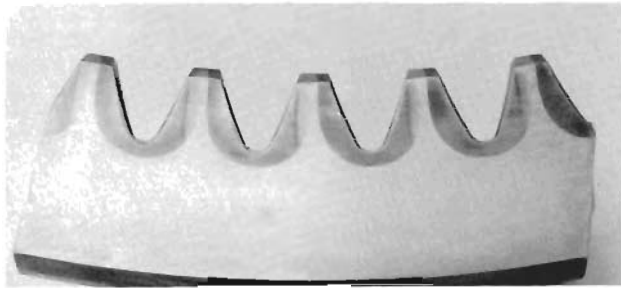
End face nital-etched pattern of a consecutive-tooth-space induction hardening technique. Pattern is exaggerated and distorted due to the extra heat picked up by the square edges. The true pattern should be established below the surface.
